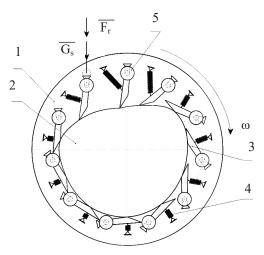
Schematic of dispensing disk with a dispenser of targeted action: 1 - sowing disk; 2 - fixed copier; 3 - lever; 4 - spring; 5 - rotating cell
